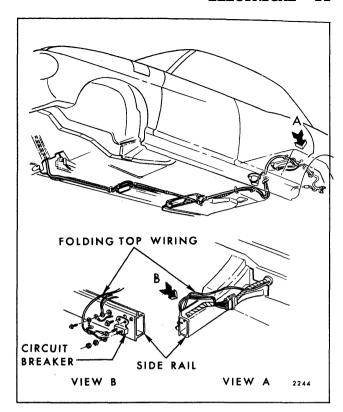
Electric Folding Top Body Wiring - Corvair
